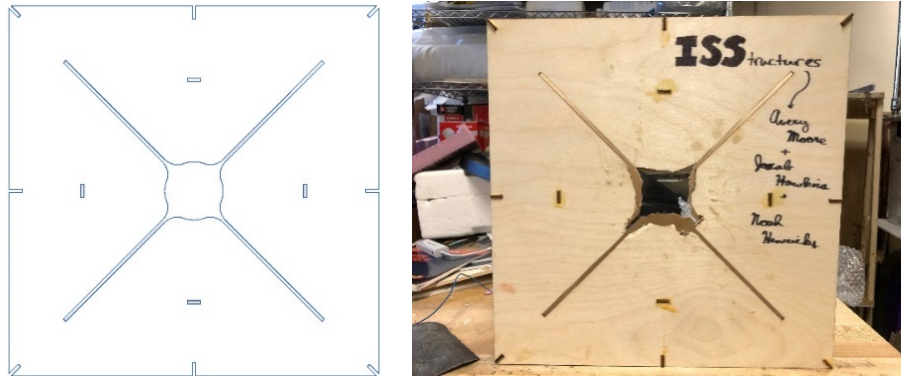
Fin Jig Template (Left), Constructed Fin Jig (Right)
